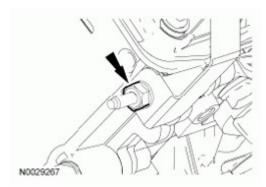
Locating Oil Level Indicator Tube Bolt Courtesy of FORD MOTOR CO.
